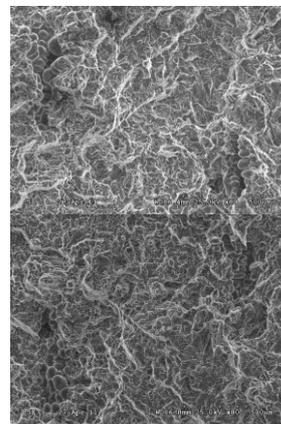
Some of the numerous pores on the fracture surface
